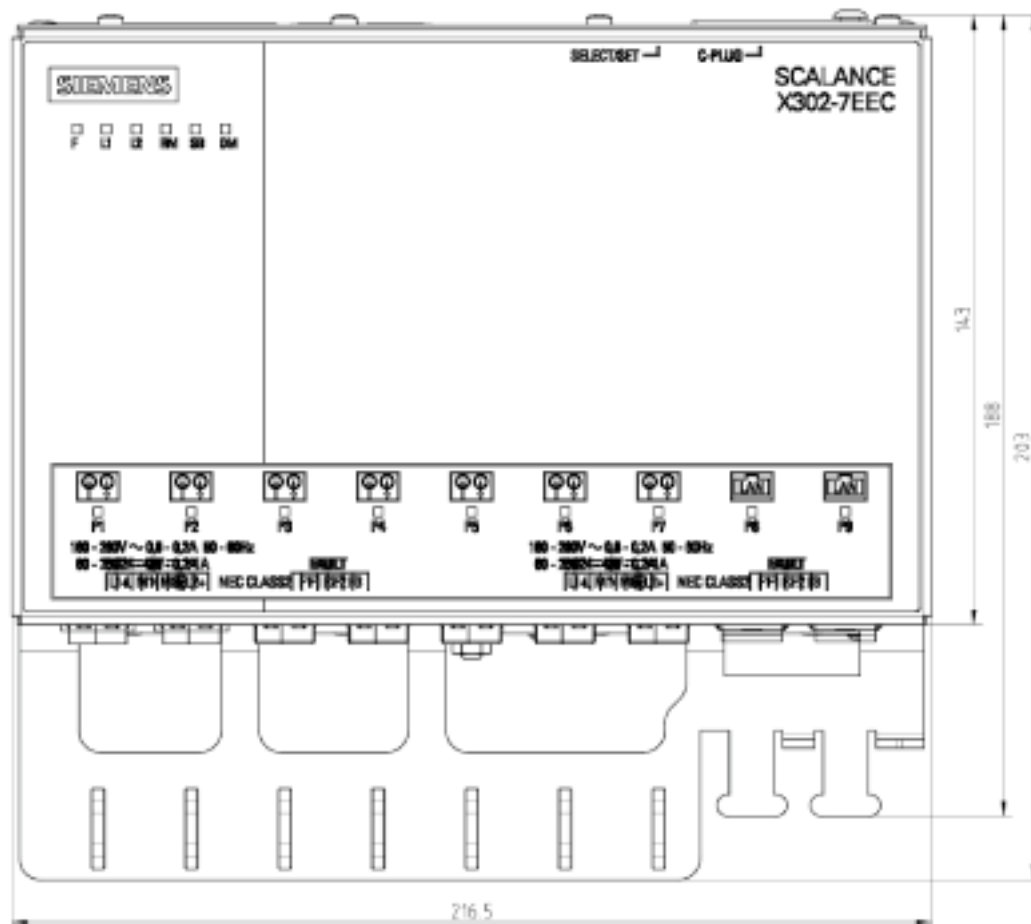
Dimension drawing IE Switch X302-7EEC - view
